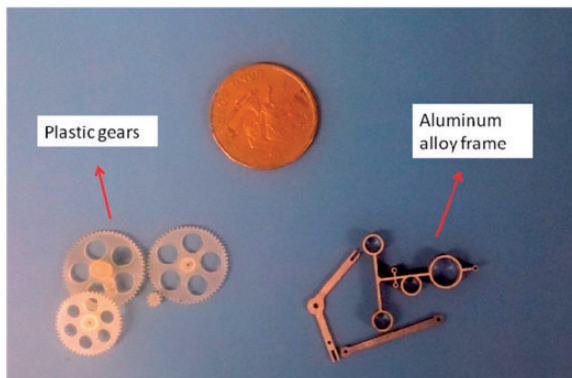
Plastic gears made by rapid prototyping machining (left). Aluminum alloy parts made by electric discharge machining (right). Diameter of dime (HKD) = 25 mm (top) used as reference for size.
